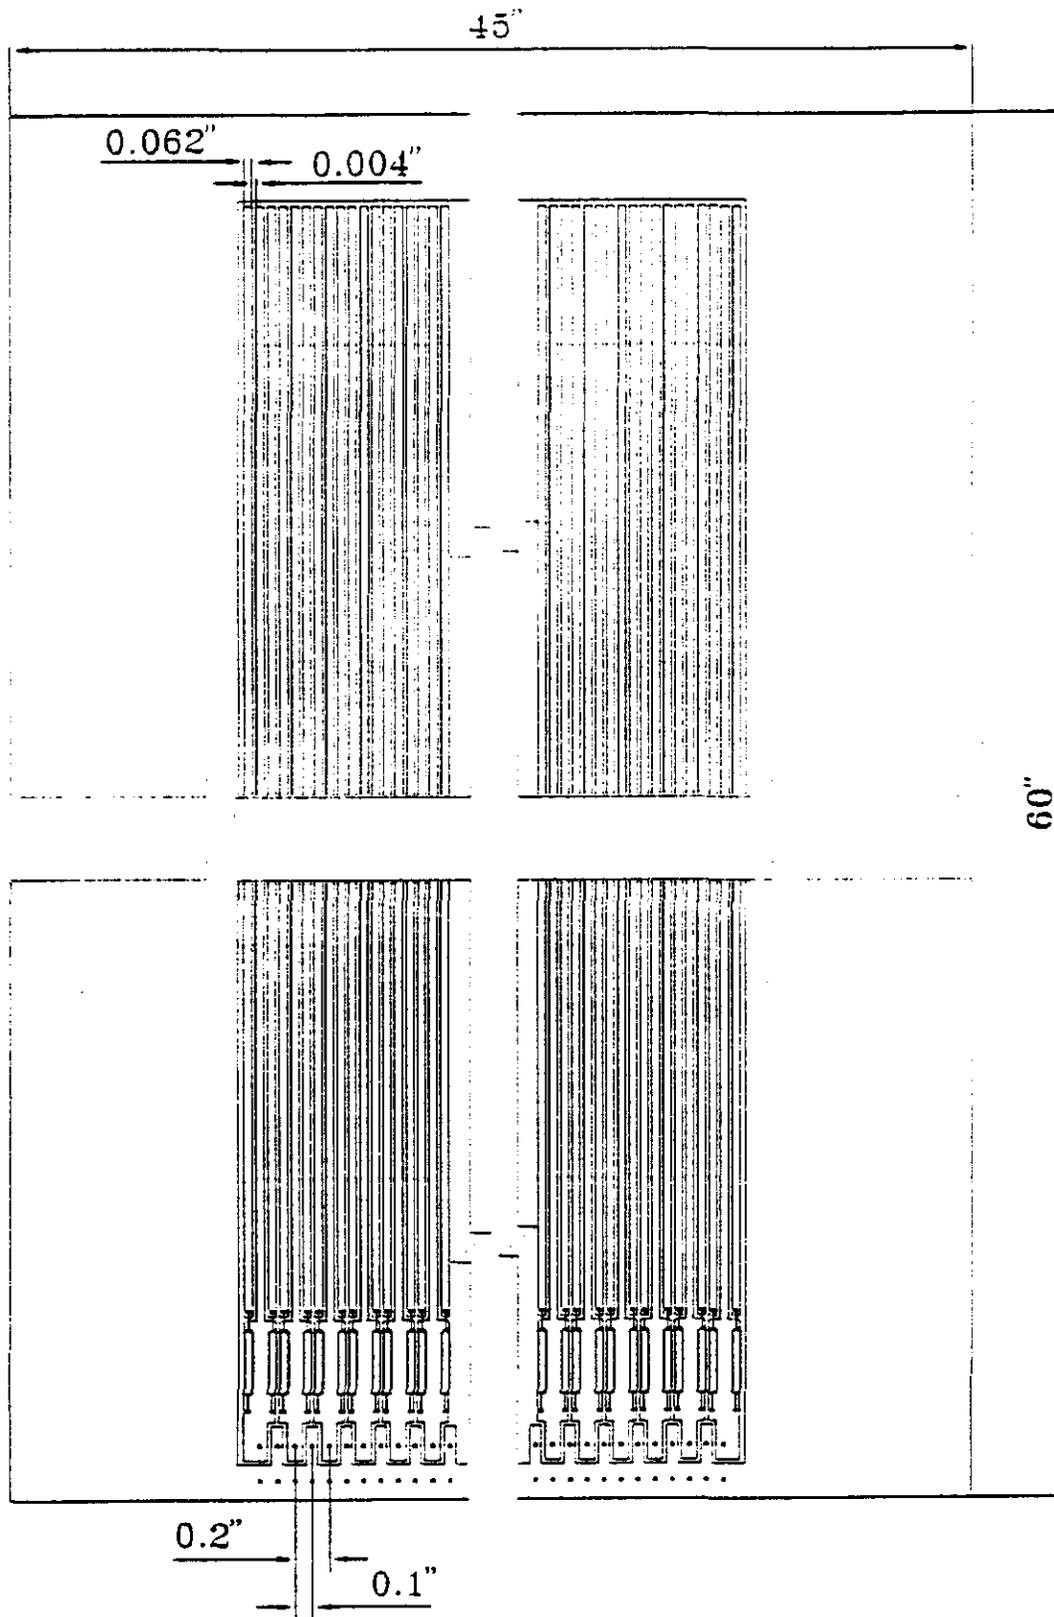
Strip board layout; one out of each three strips is read-out, two floating ones are grounded through a large resistor.
